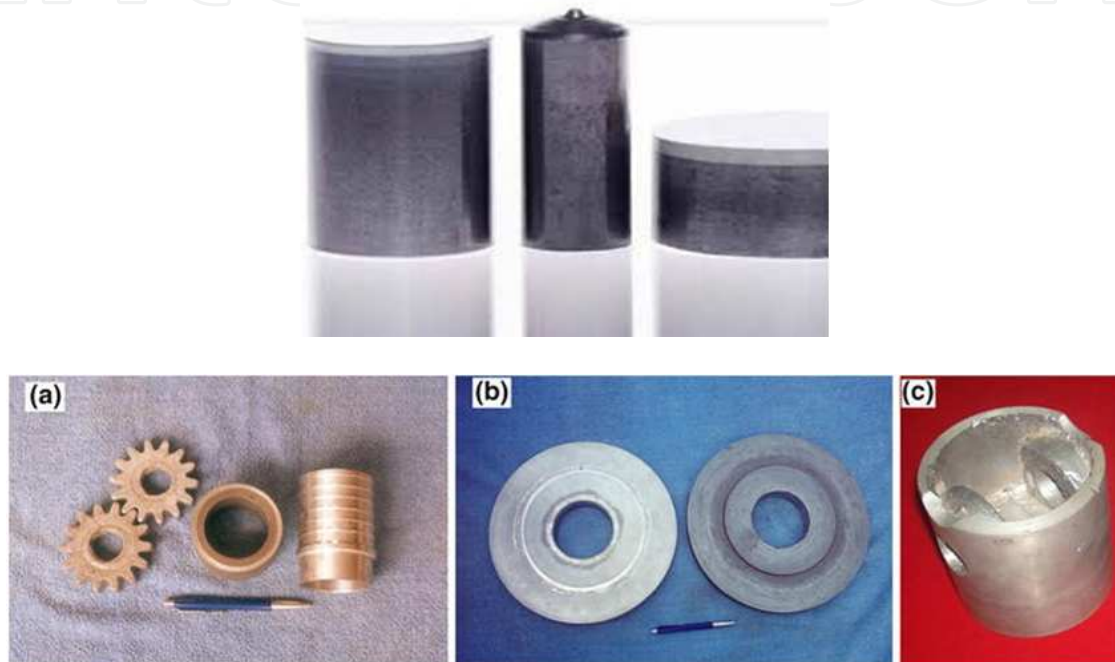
Functionally Graded Components; (a) Cylinder liners and gears; (b) Brake rotor discs; and (c) Piston fabricated by centrifugal casting method [8].
